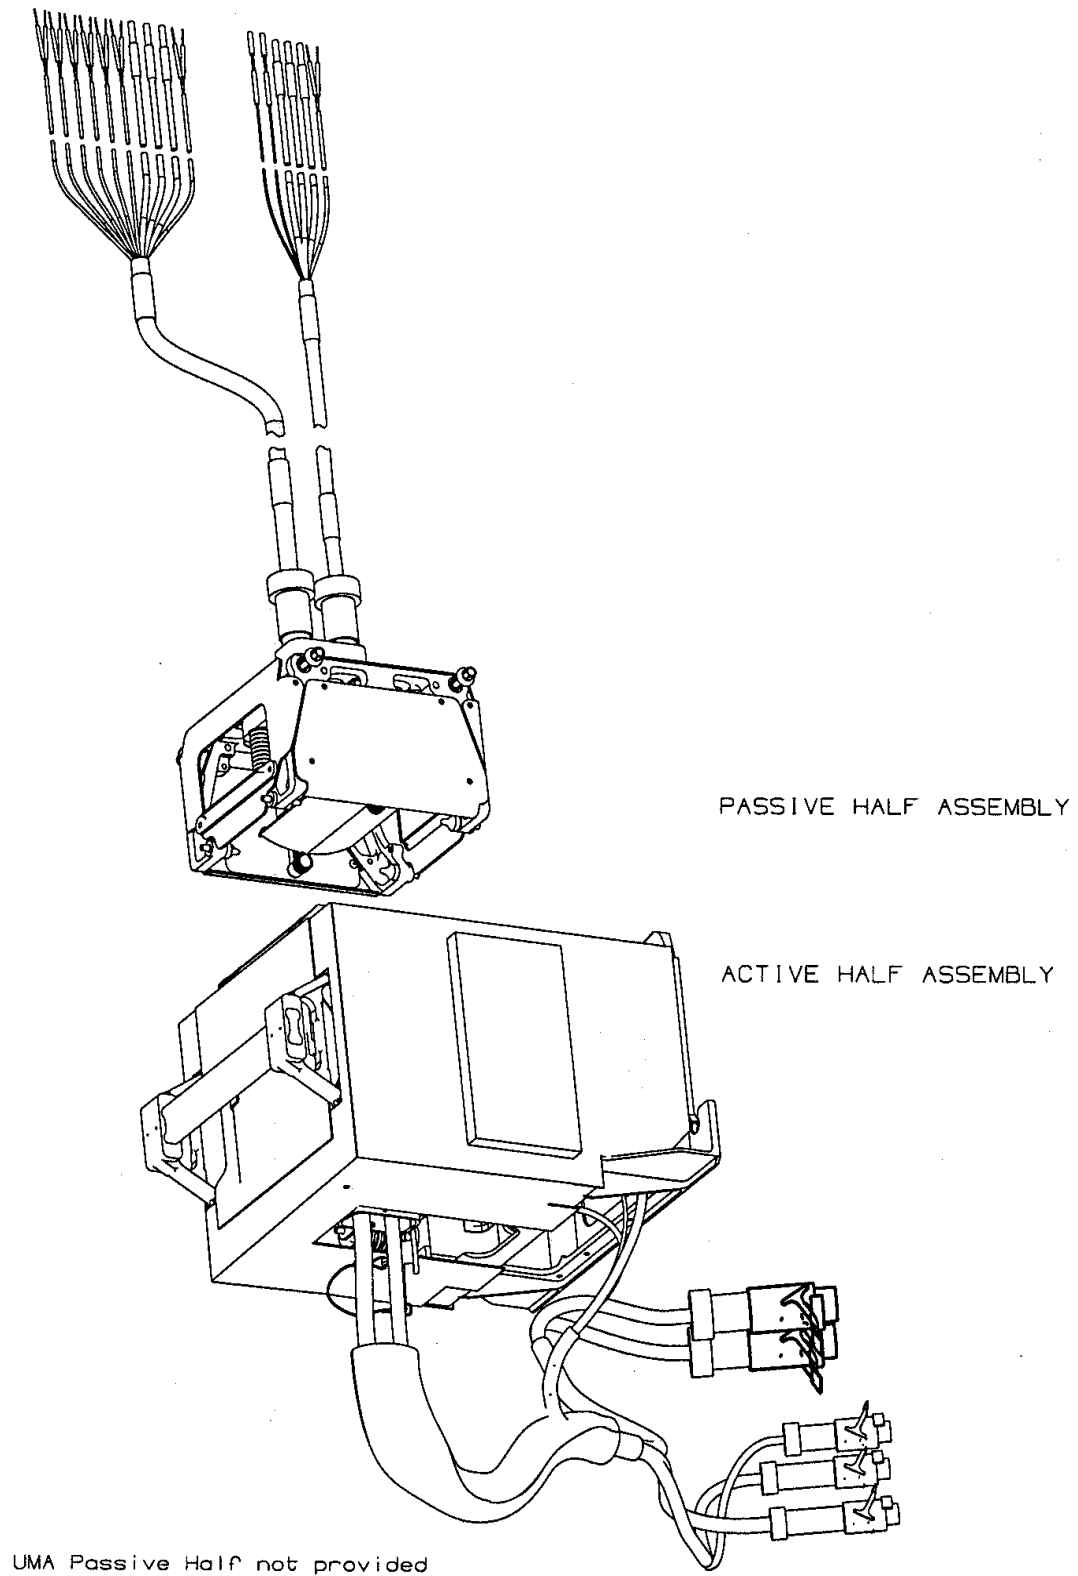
UMBILICAL MECHANISM ASSEMBLY
